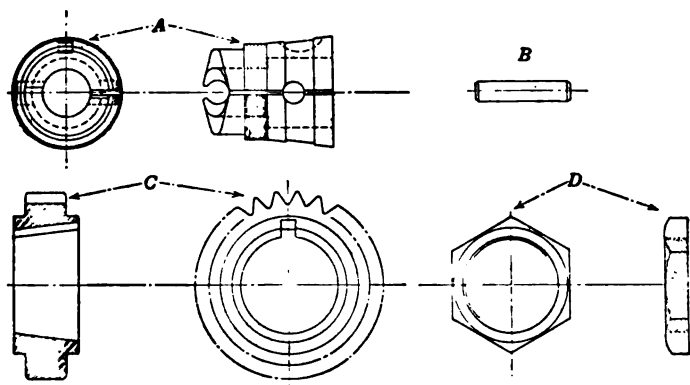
Driving sprocket and taper sleeve upon which it is mounted
